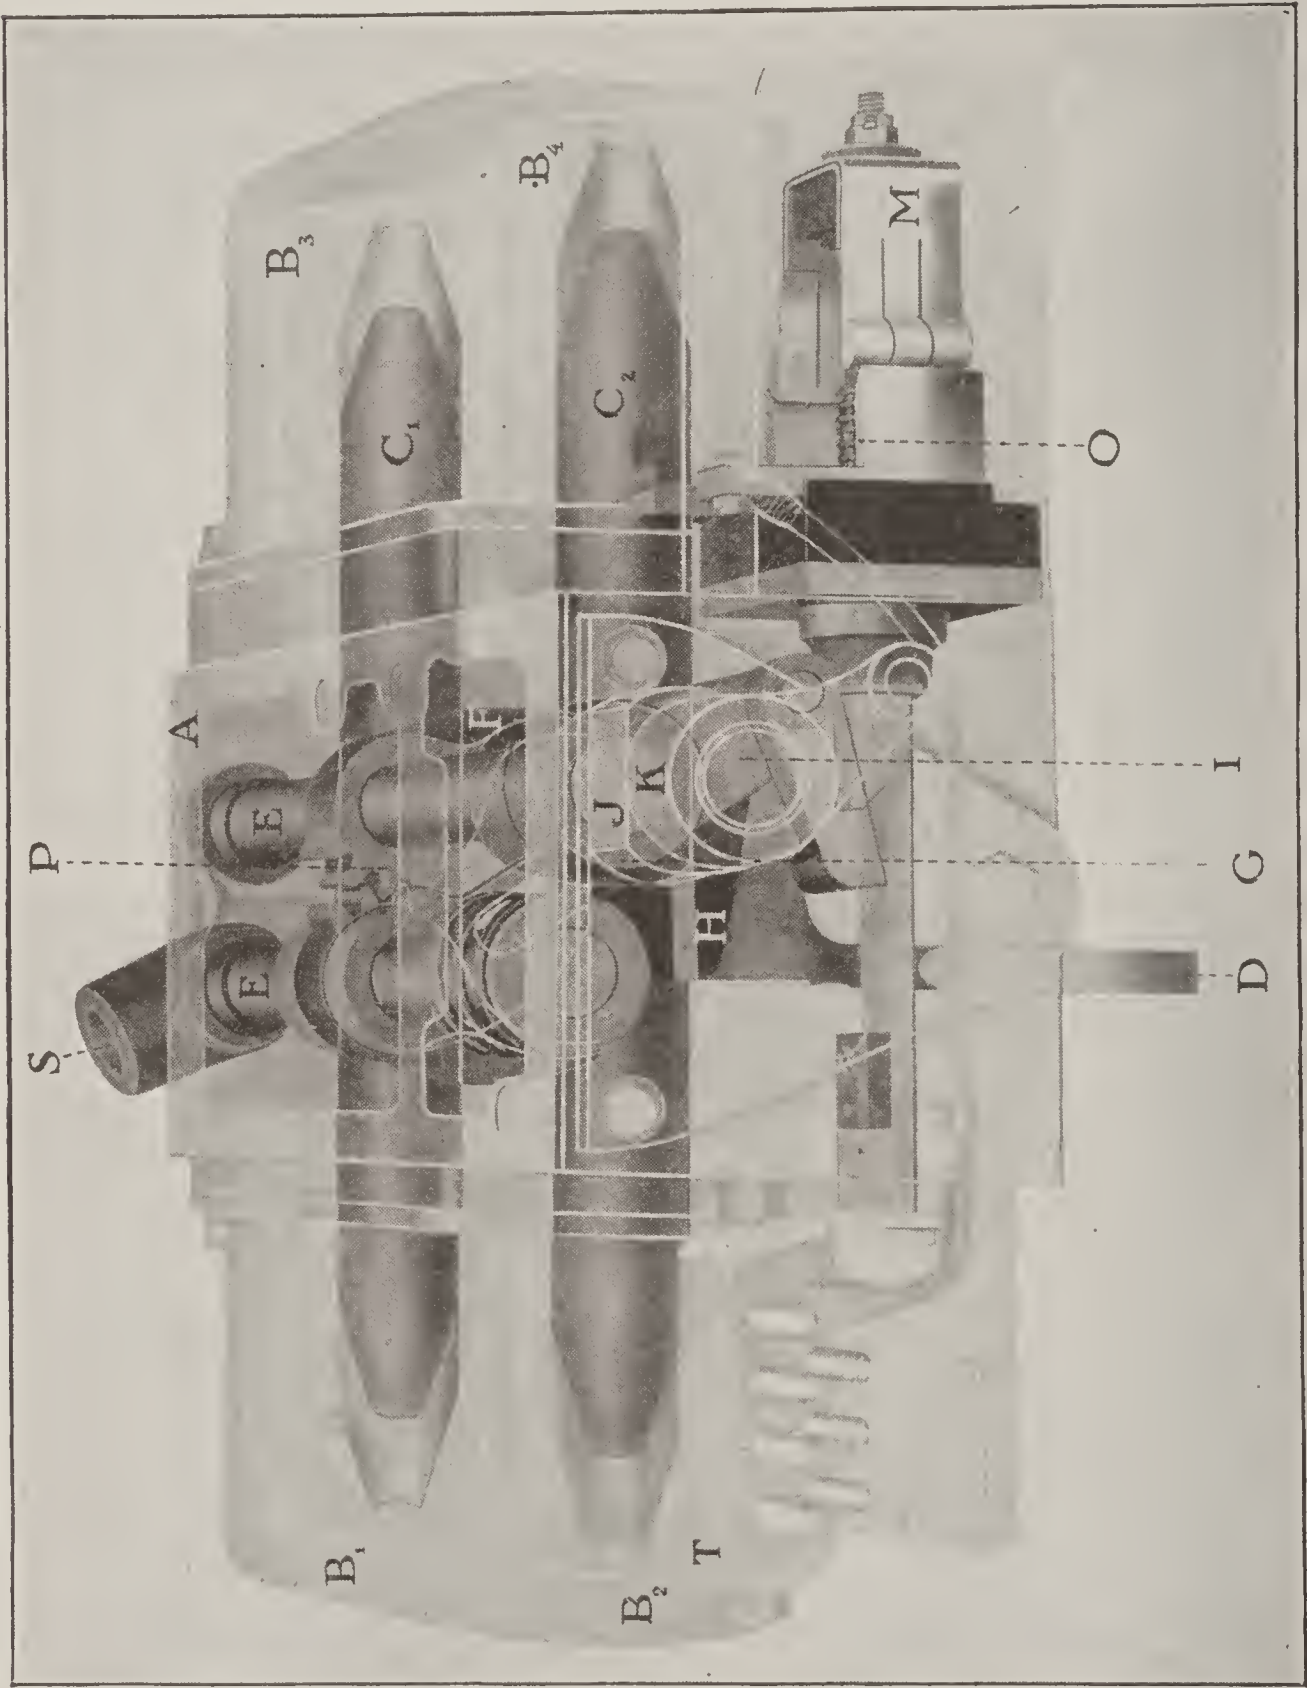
Phantom View of C-H Gear-Shifting Arrangement
